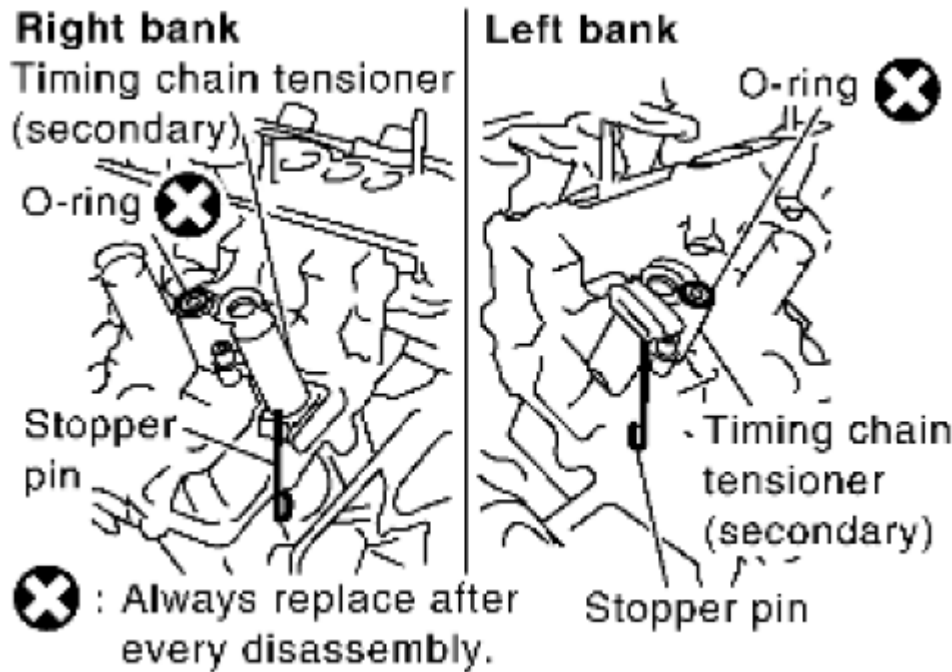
Identifying Timing Chain Tensioner From Cylinder Head
